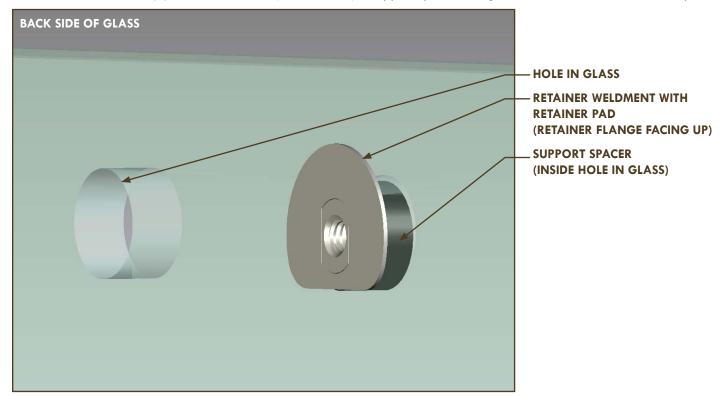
Retainer Weldment (Flange facing up) with Retainer Pad attached.
